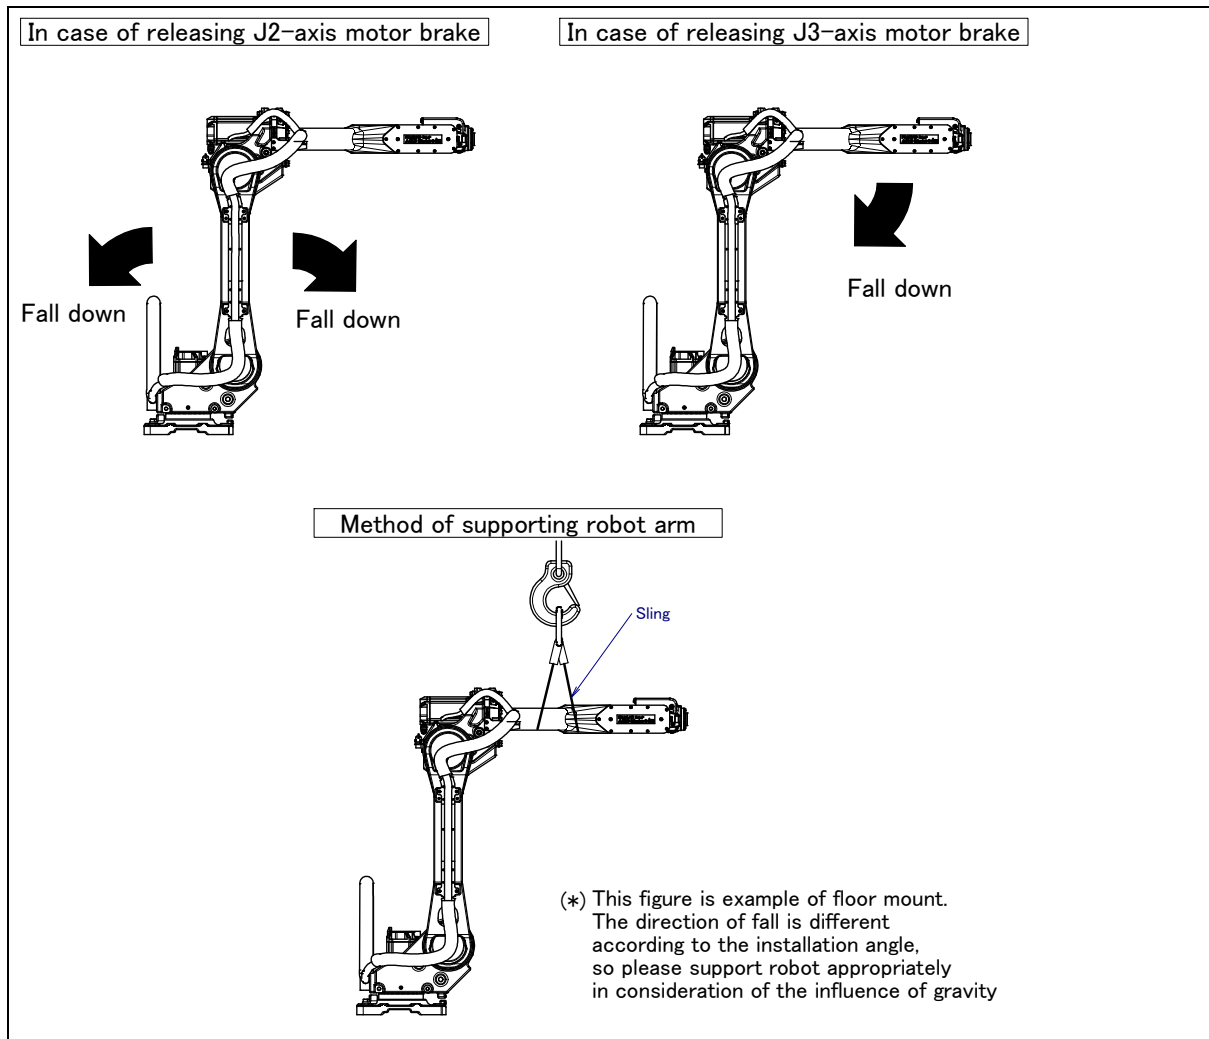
(a) Releasing J2 and J3 motor brake and measures
